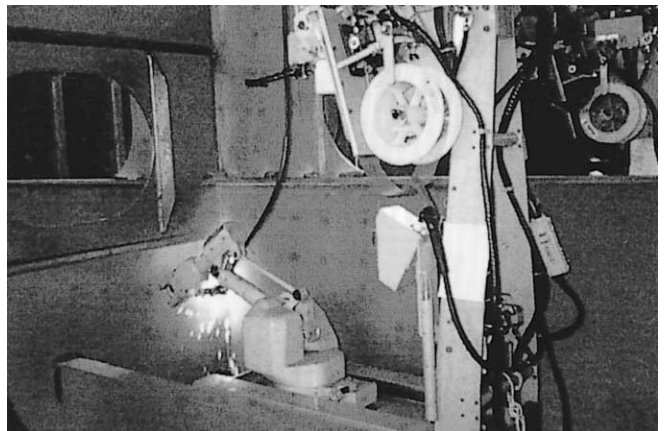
The application of DW-100V in robotic welding of cross joints of longitudinal and transverse components (wire dia: 1.4 mm)
